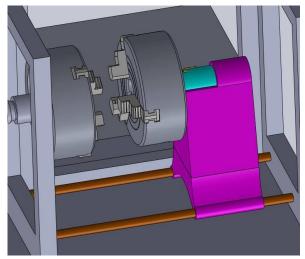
CAD Rendering of 2 Rail System with Ball Bearings
